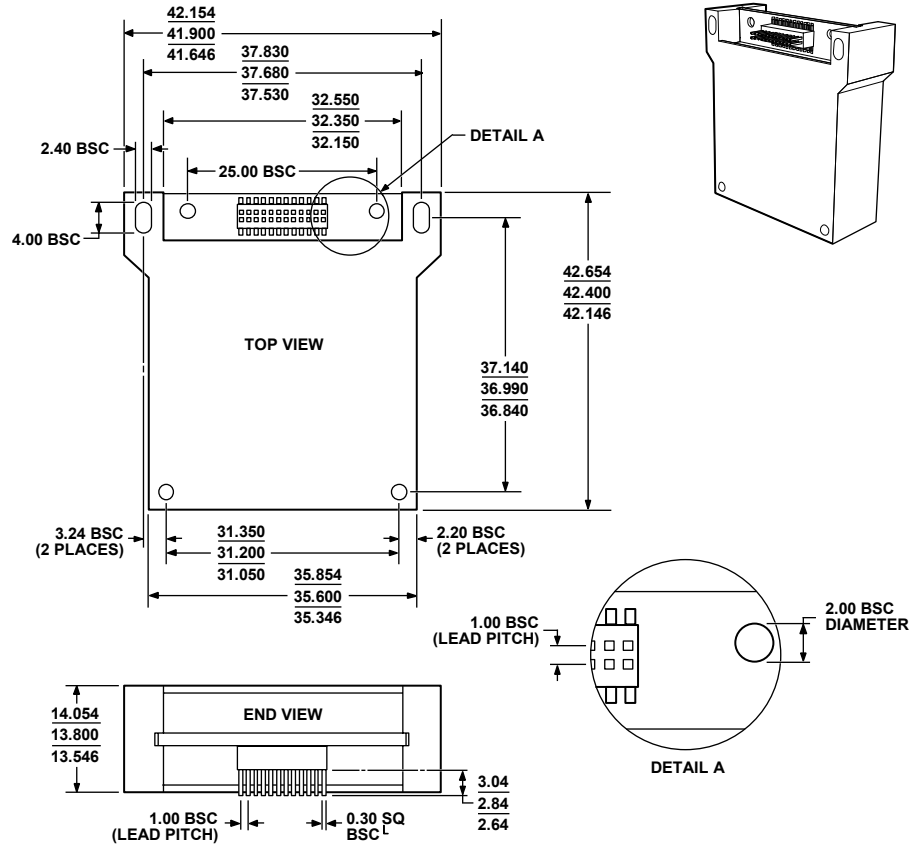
ADIS16120 PCB Module with Connector Interface (ML-24)
